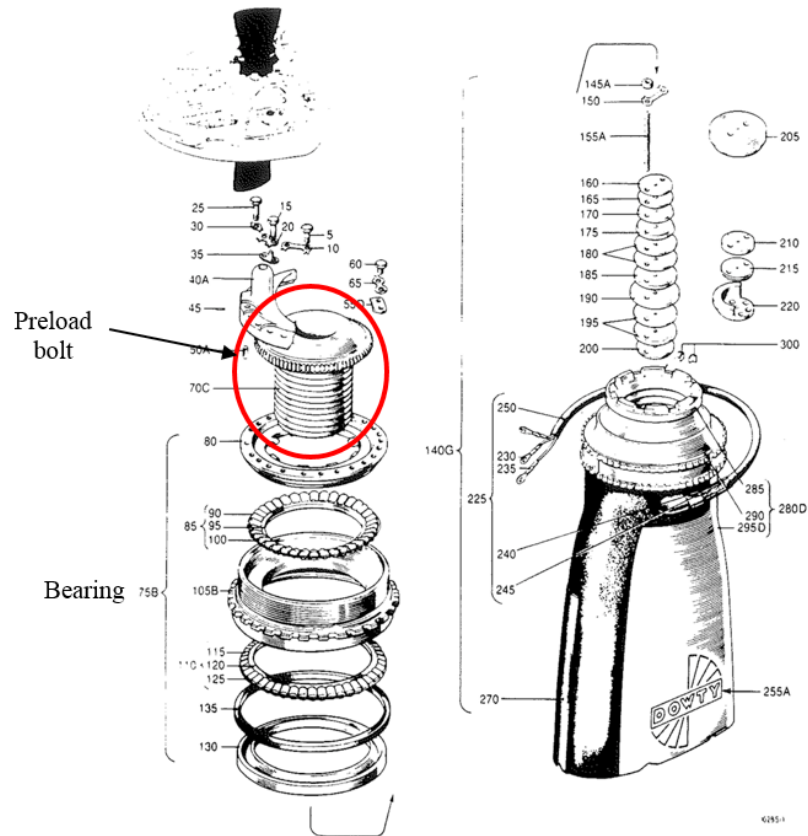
Exploded view of a propeller blade root, taken from the propeller OHM⁽³⁾
